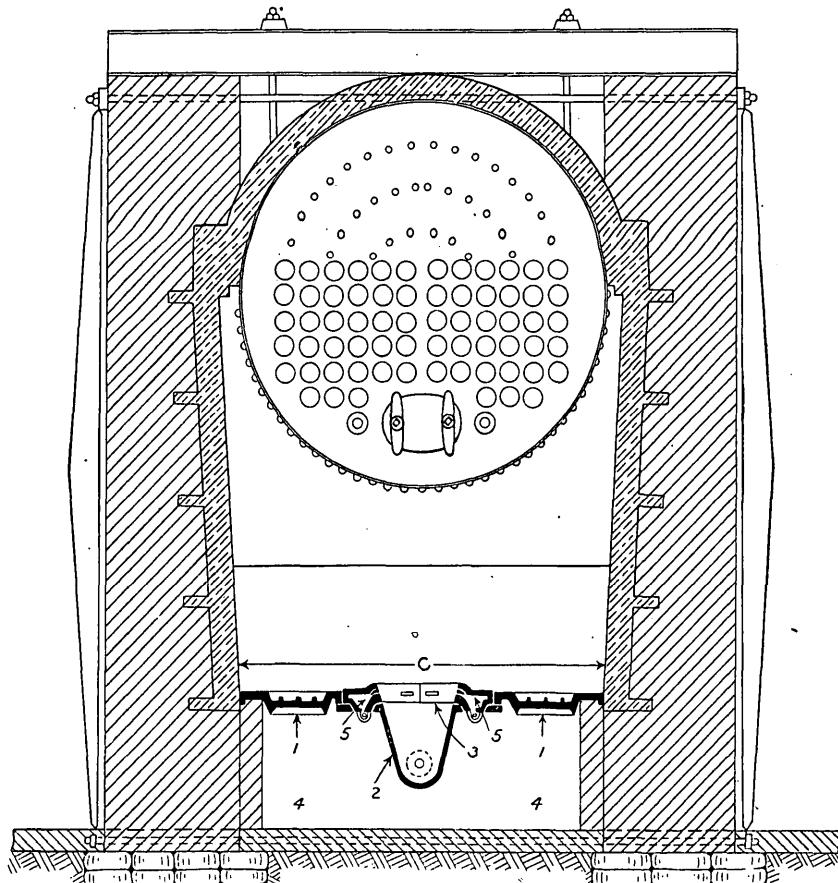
Underfeed stoker and return tubular boiler, cross section. 1, Dead plates; 2, retort; 3, tuyère blocks; 4, air chamber; 5, space through which air passes before entering retort.
